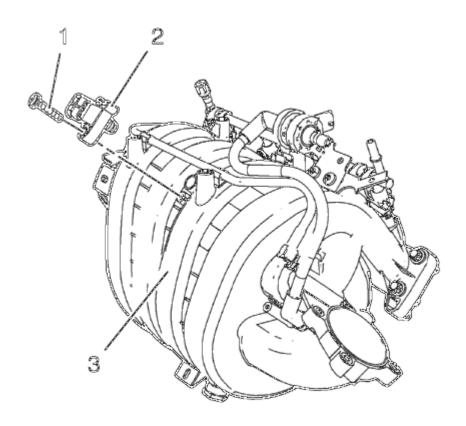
Intake Manifold And Mount Courtesy of GENERAL MOTORS COMPANY
